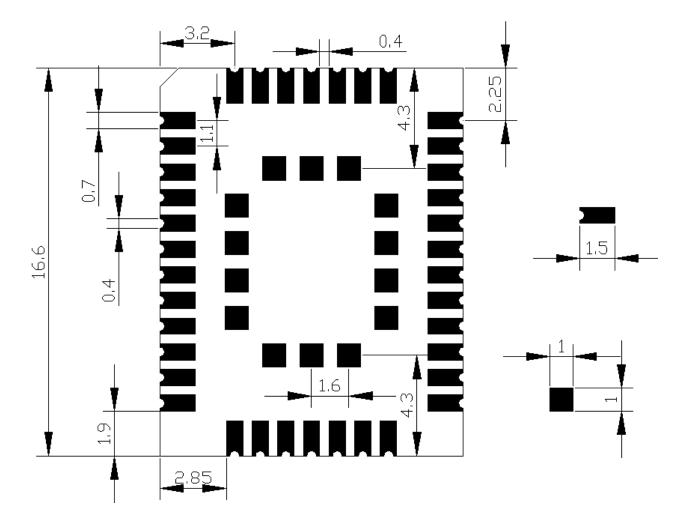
FC20 Bottom Dimensions (Unit: mm)
